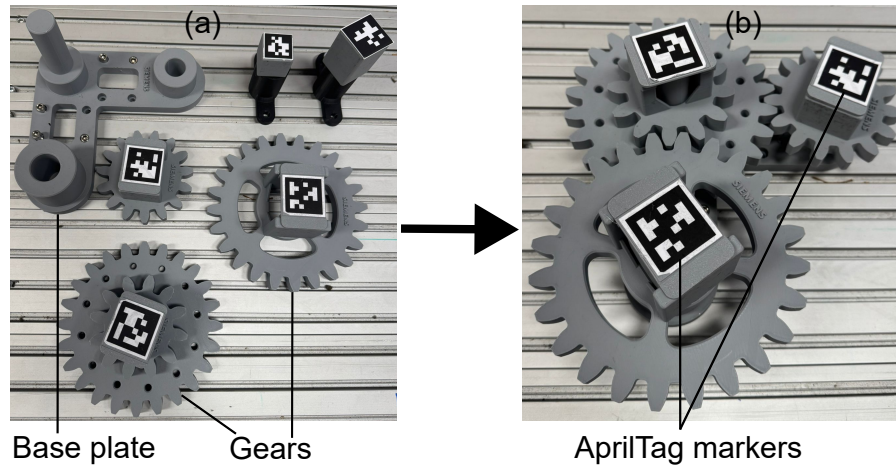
Gearbox assembly task visualization. (a) Initial layout of the fixture (base plate) and movable components (gears and shafts) within the workspace. (b) Target assembled configuration. AprilTag markers attached to the movable parts enable online pose estimation used by the perception and recommender modules.
